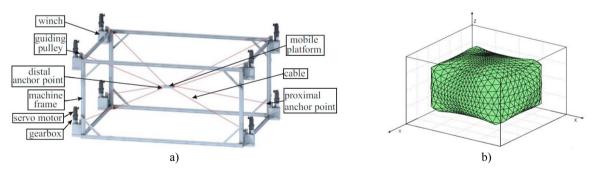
a) Concept and components of a cable-driven parallel robot [15], b)Workspace of CDPR
